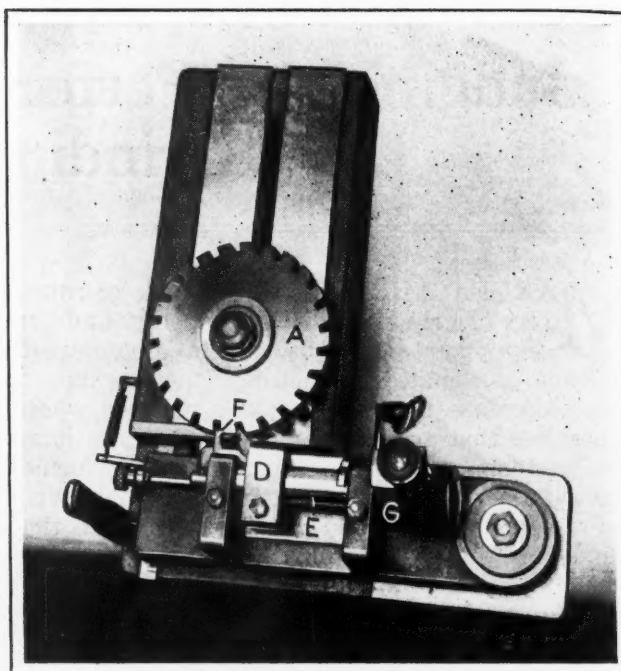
Inspection Fixture Used for Checking the Tooth Spacing of the Index-plates Ground on the Machine Shown in Fig. 1
